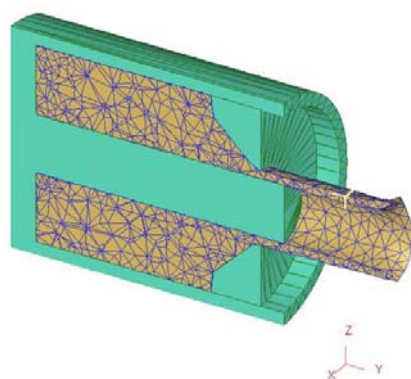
Schematic illustration of the aluminum alloy (A6061) extrusion process
